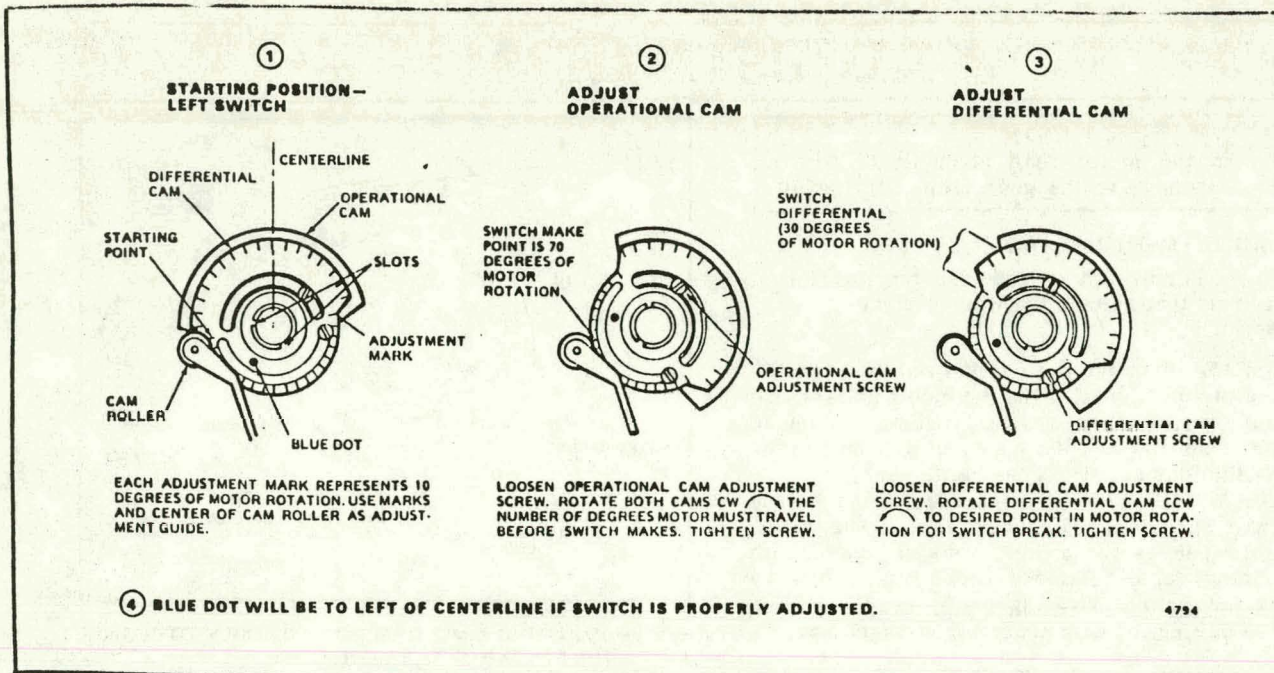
ADJUSTING LEFT SWITCH MAKE AND BREAK POINTS.
